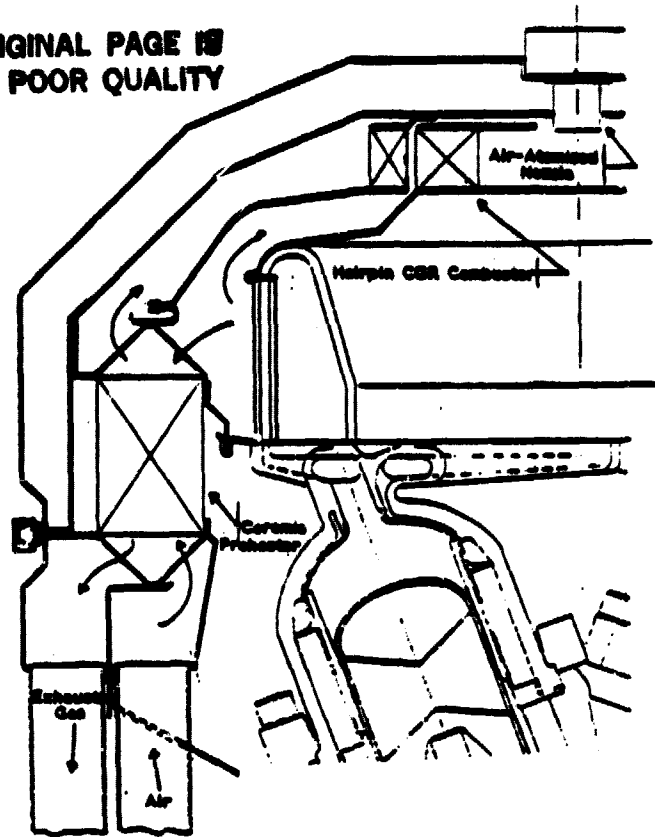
Side View of RESD Showing Preheater Clamping
